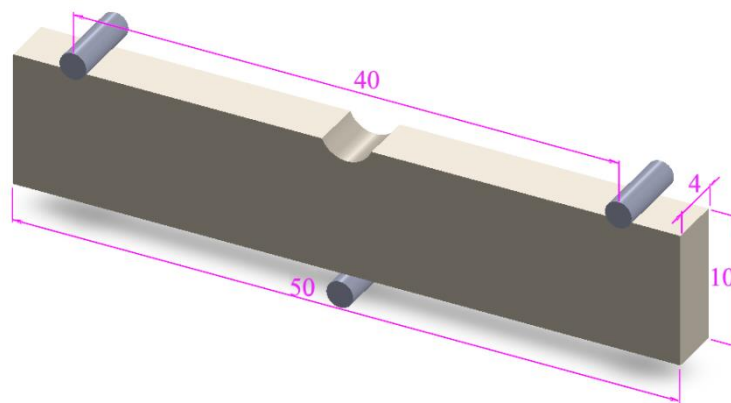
Dimension of the U-notch specimen (in mm) and the position of the loading rollers.
